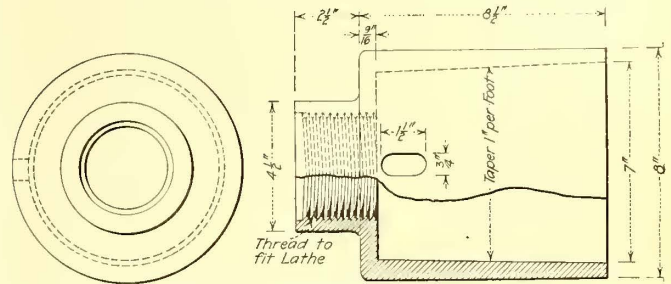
BEARING CHUCK USED IN THE SHOPS OF THE WILLIAMSPORT PASSENGER RAILWAY
